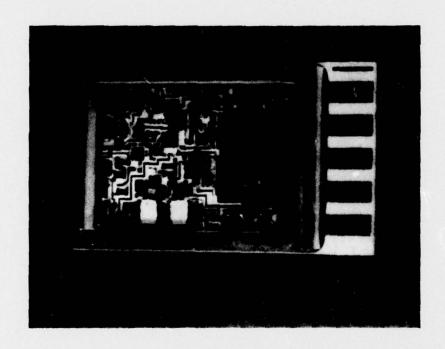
VCXO HYBRID ASSEMBLY
